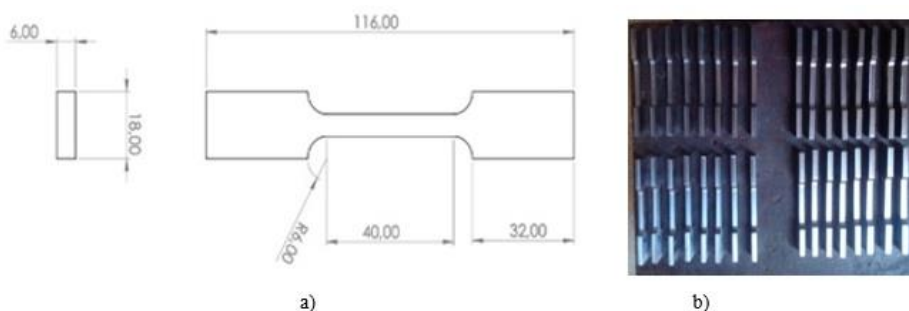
Fatigue test specimen: a) dimensions according to the standard (ASTM E8/E8M:16) a) AISI 304 test specimens for fatigue test without corrosion
